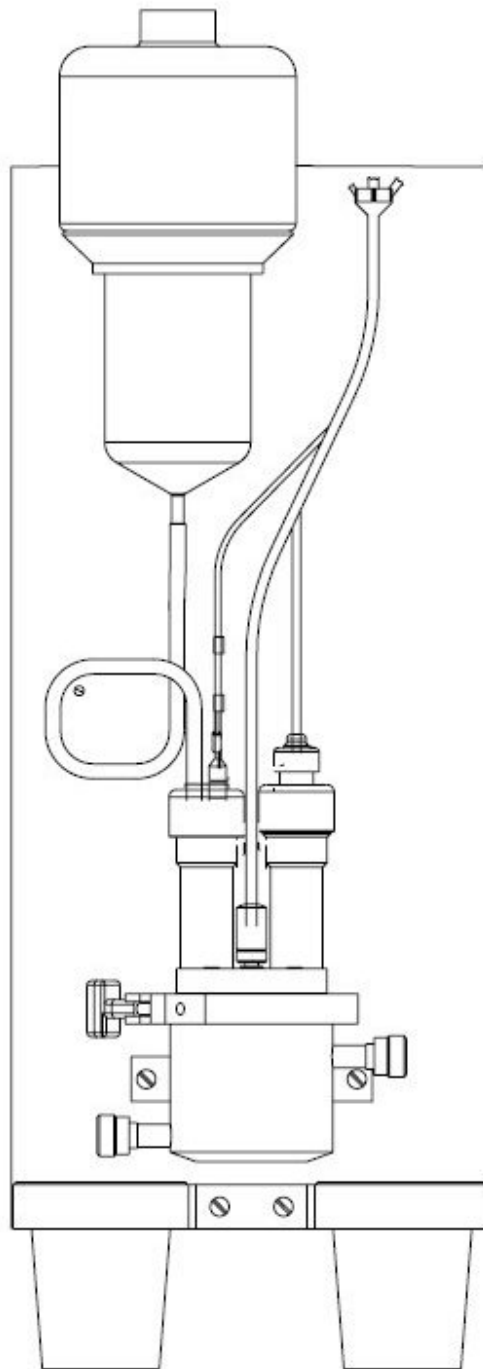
High Purity Electrode Mounting Assembly (Panel Mounted Option)
